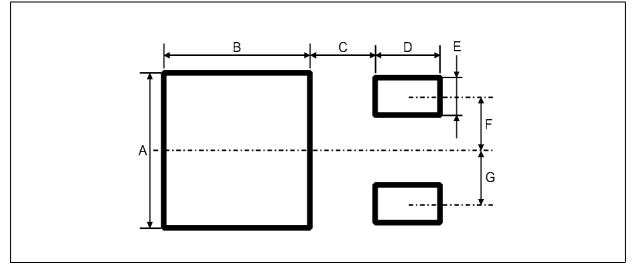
Drawing dimension DPAK (type IDS-subcon.)
